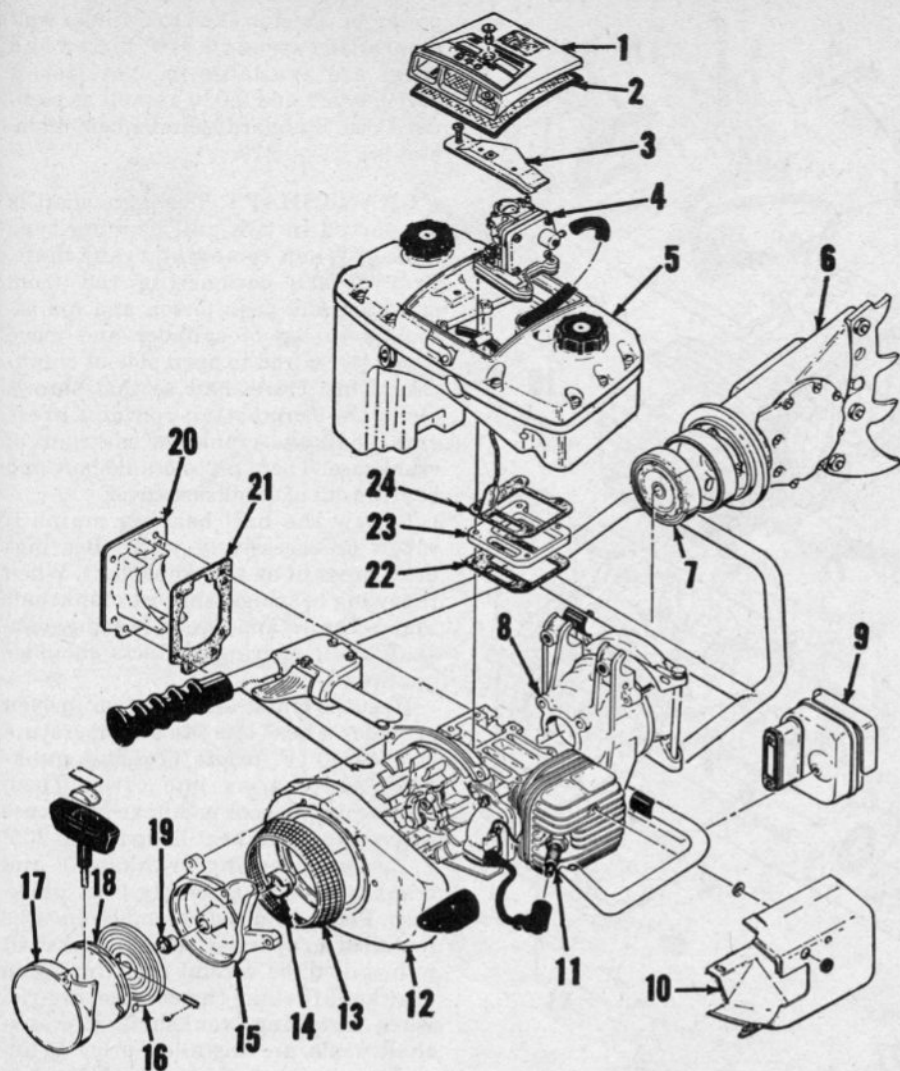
Exploded view of Model 940 chain saw components.
